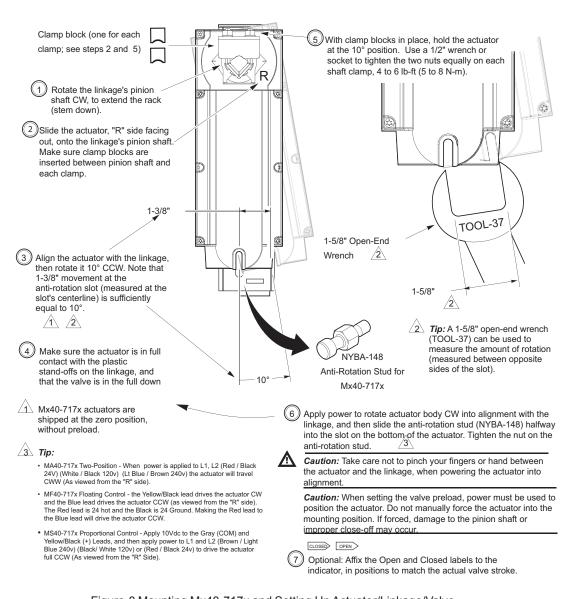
Mounting Mx40-717x and Setting Up Actuator/Linkage/Valve
